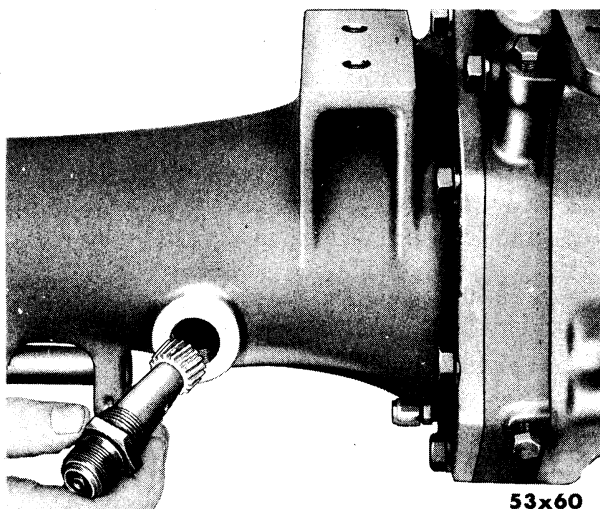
Removal and Installation of Speedometer Drive Pinion
